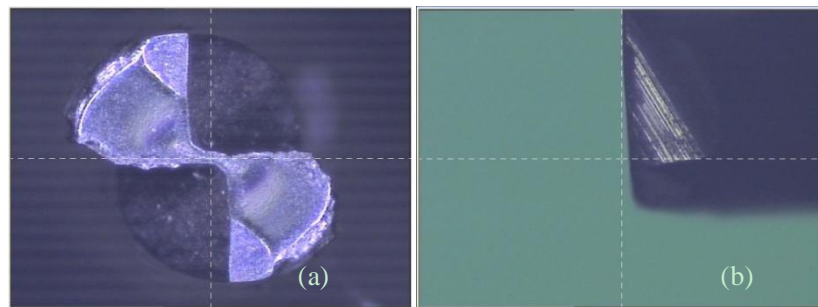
Step 2: tool wear after machining 6 meters in distance (a) bottom face (b) rake face
